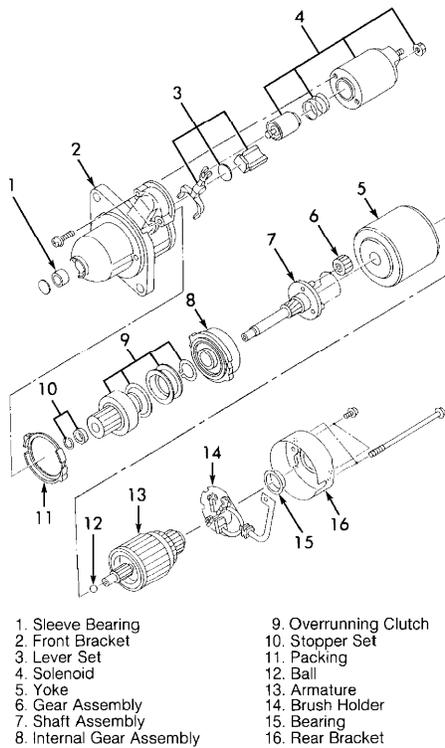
View of Mitsubishi Reduction Gear Starter (SVX)
